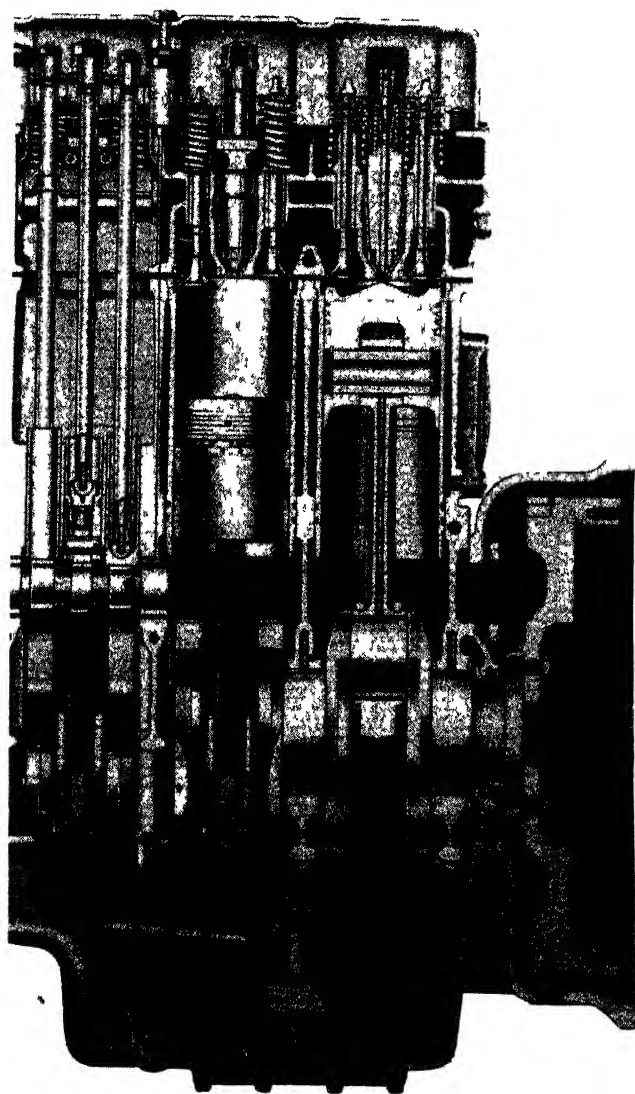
B.—LONGITUDINAL SECTION OF CUMMINS ENGINE, REAR HALF.
